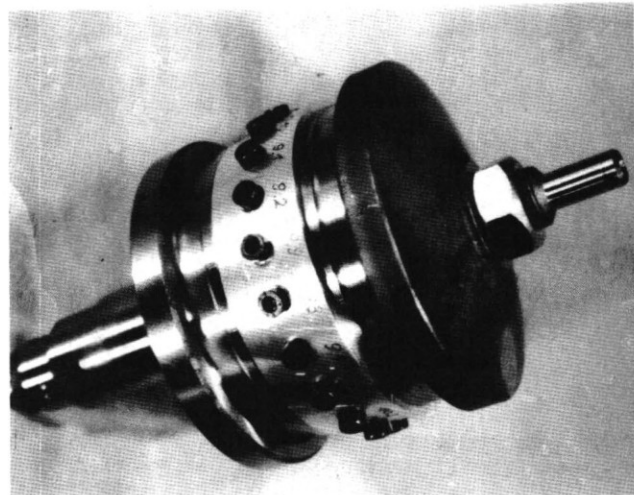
Second test rotor after successful cold spin test to 47 600 rpm
